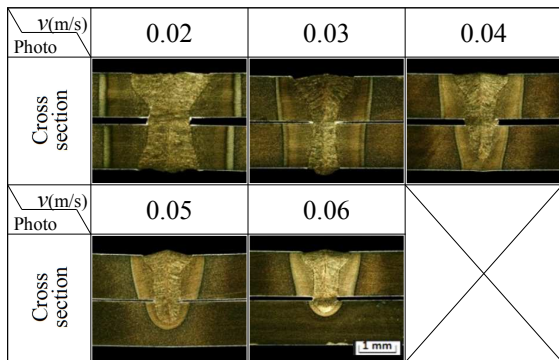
Cross section of weld with welding speed in hot-stamped steel lap welding
